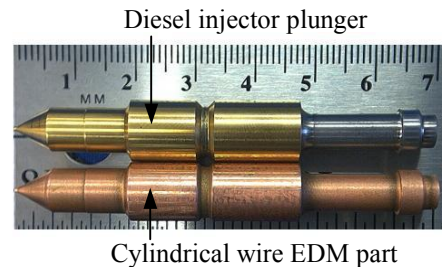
A cylindrical wire EDM part with the same shape as the diesel engine injector plunger
